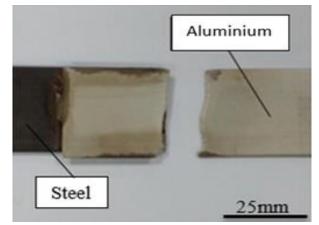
Failure location of brazed joint with 15 minutes wetting time after shear test.
